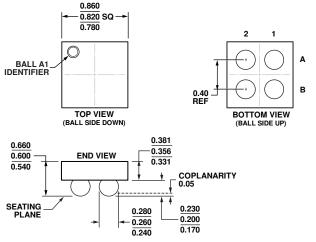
4-Ball Wafer Level Chip Scale- Package [WLCSP] (CB-4-2) Dimensions show in millimeters
